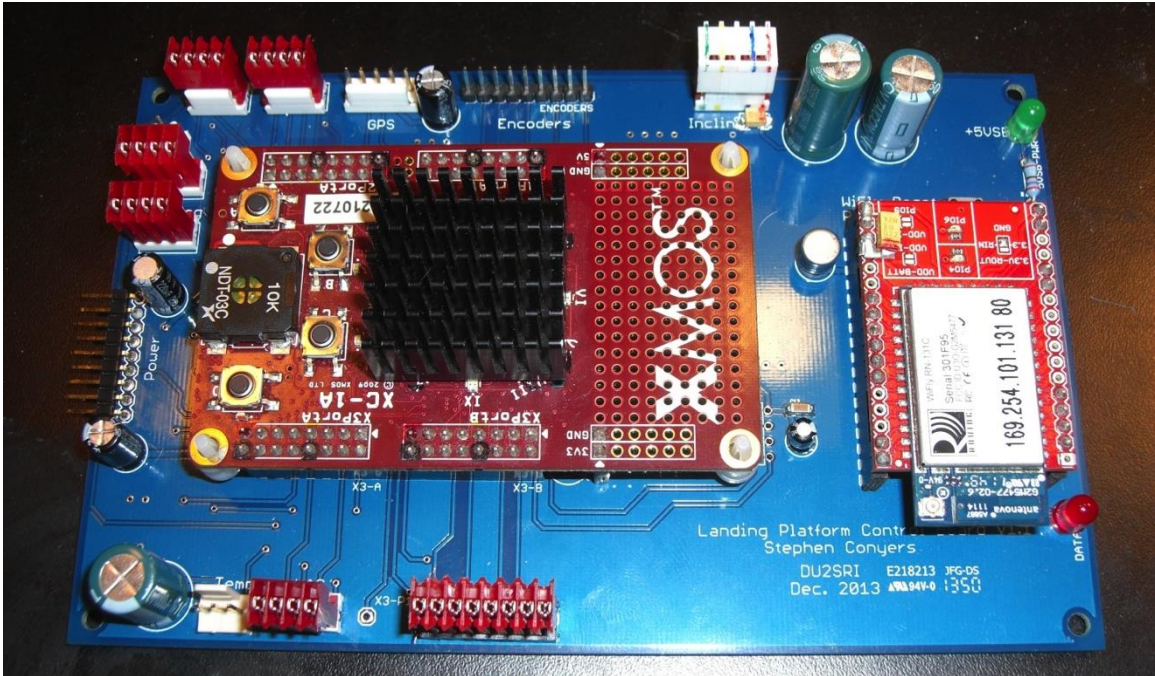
PCB control board with the XMOS, WiFly, ADCs and Multiplexer.
